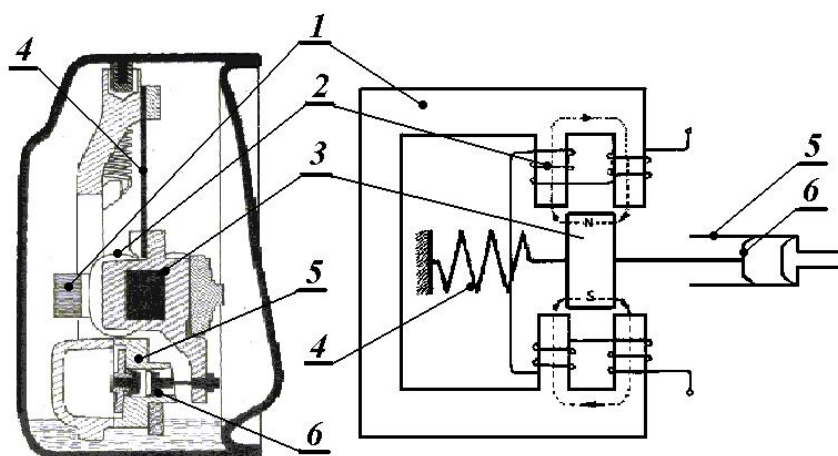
Section of the compressor driven by oscillating rotating electrical motor with complex trajectory and its scheme; 1 – stator's core, 2 – winding, 3 – movable part, 4 – spring, 5 – cylinder, 6 – piston
